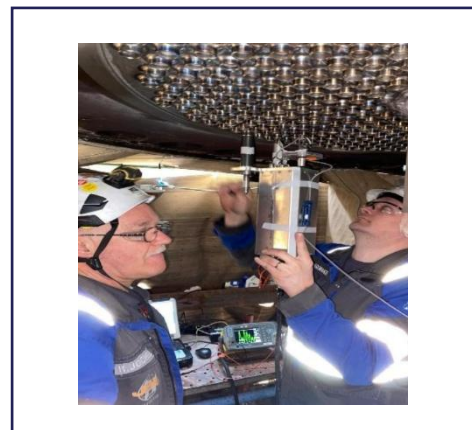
UT examination of the tube-to-tube sheet welds at the bottom
